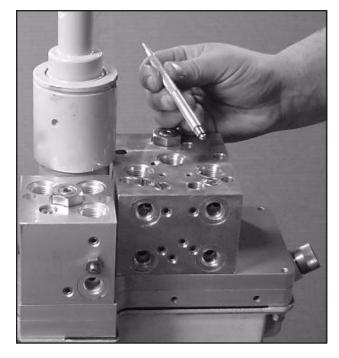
Use a magnet to retrieve the Relief Valve Ball.
